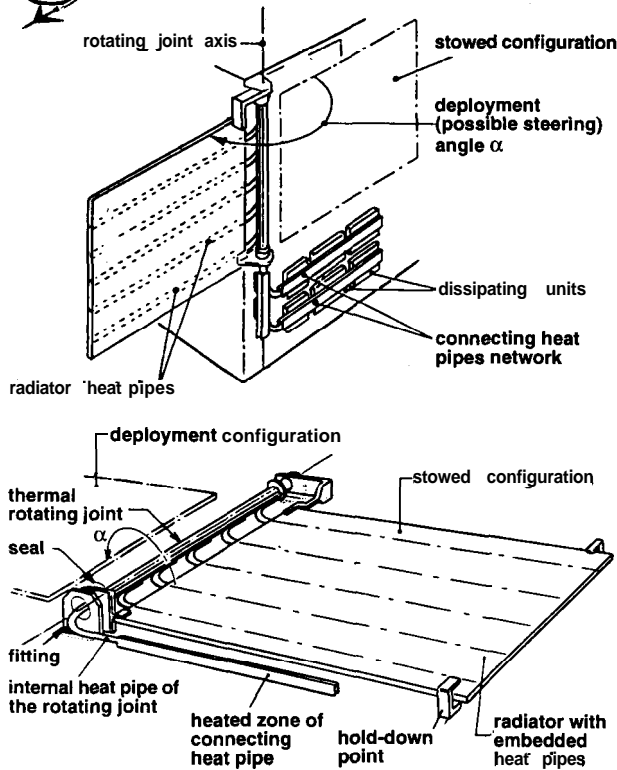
Typical deployable/steerable radiator and joint configuration [Ref. 2]
